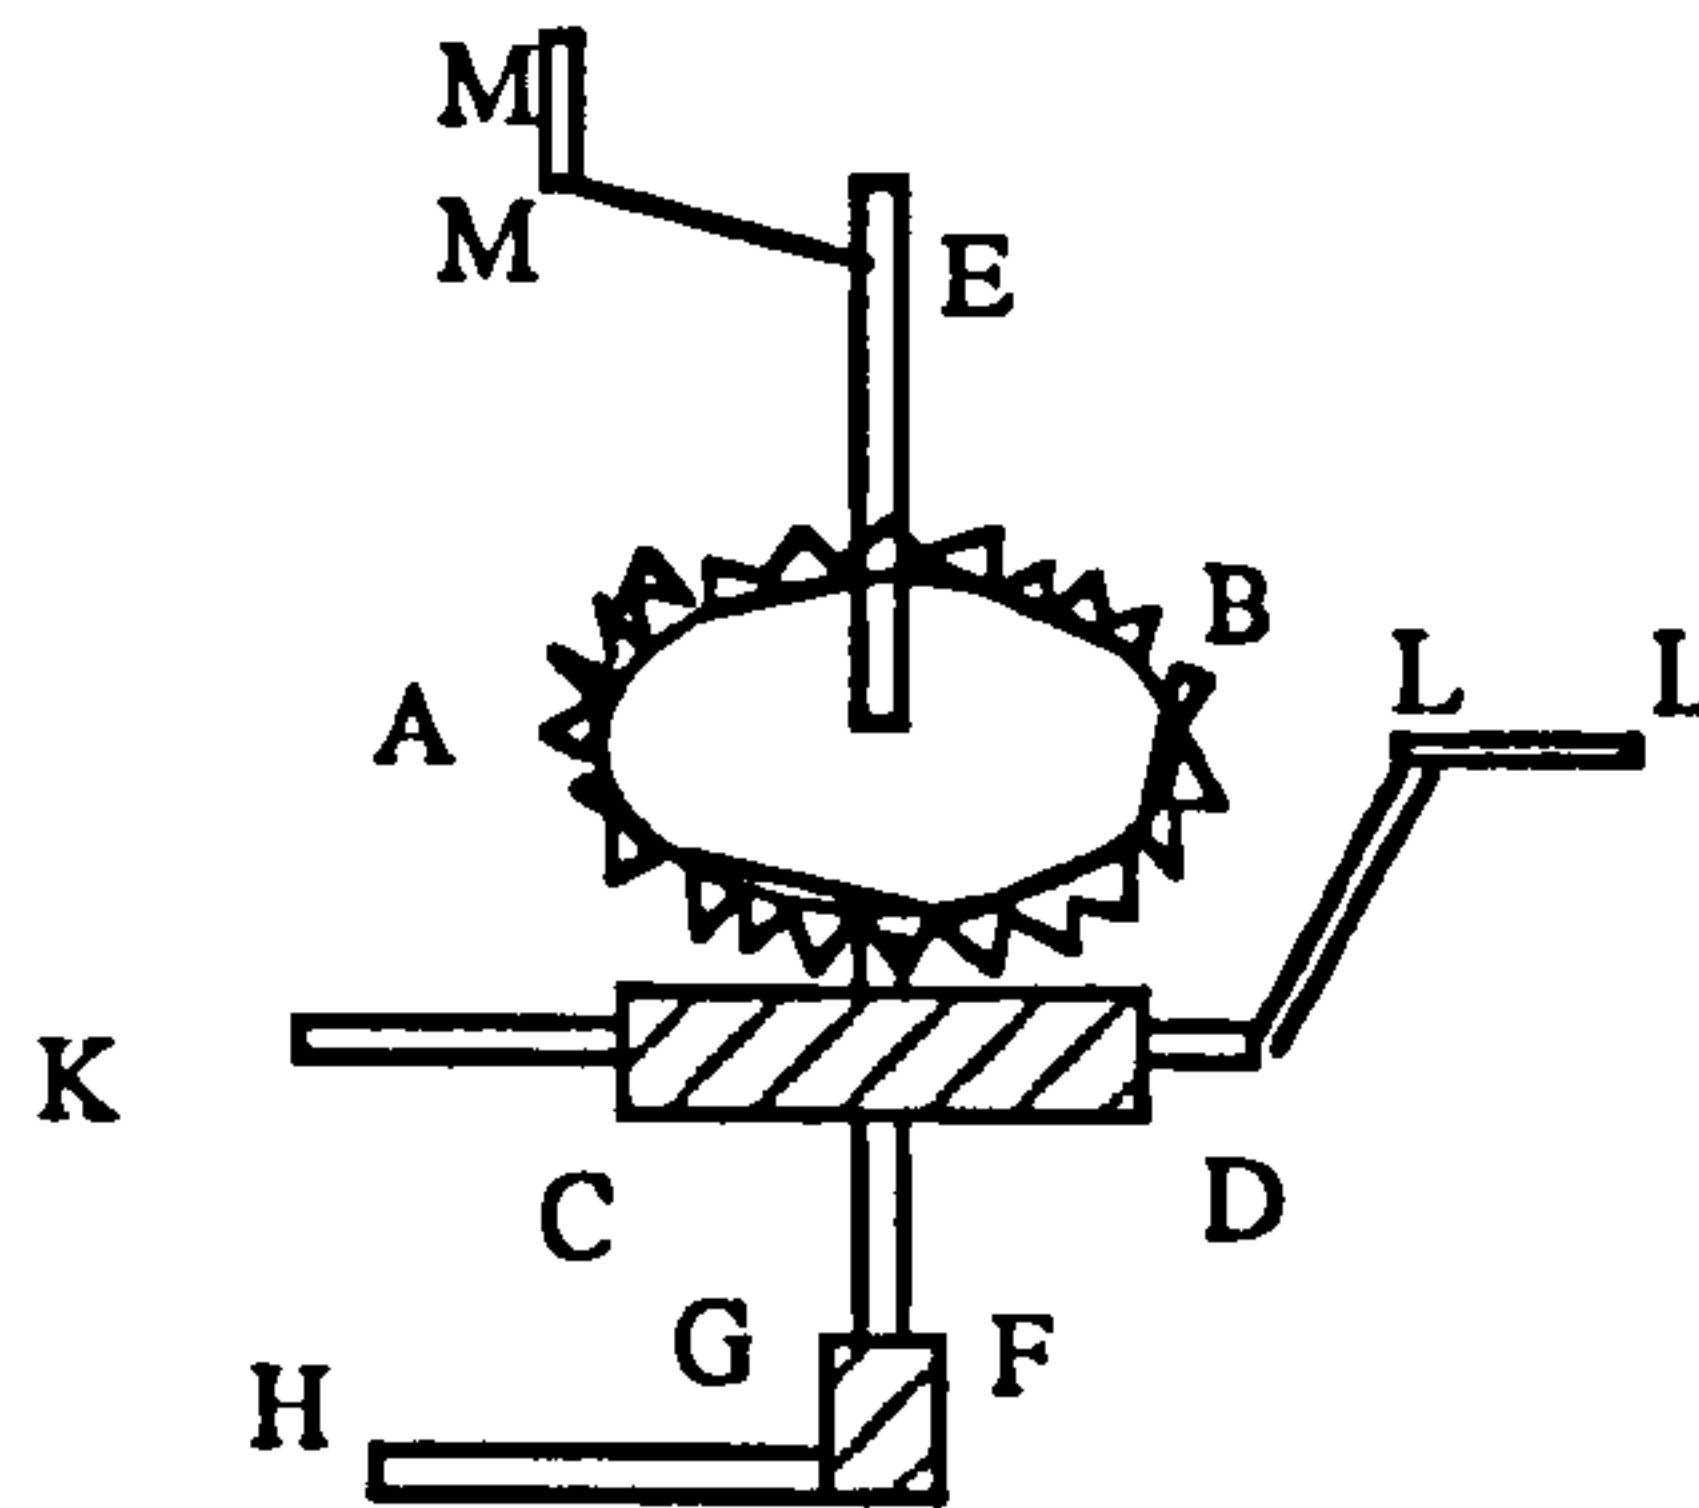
System of a toothed wheel and toothed axis, or wormdrive, to describe the forces driving basic mechanical machines.
